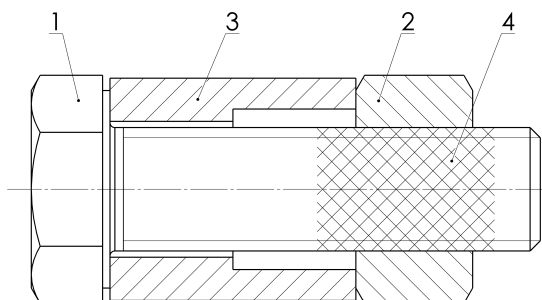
Testing assembly; 1-bolt, 2-nt, 3-spacer sleeve, 4-adhesive coated area (according to EN 15865)
